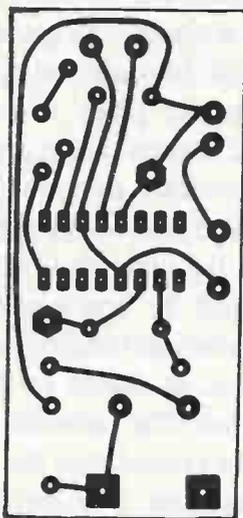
This is the full-sized foil pattern for the Proximity Alarm. You can use it to etch your own printed-circuit board.
